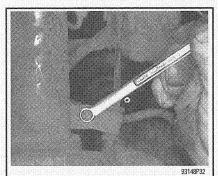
Unbolt the anti-lock brake sensor line from the air spring housing
